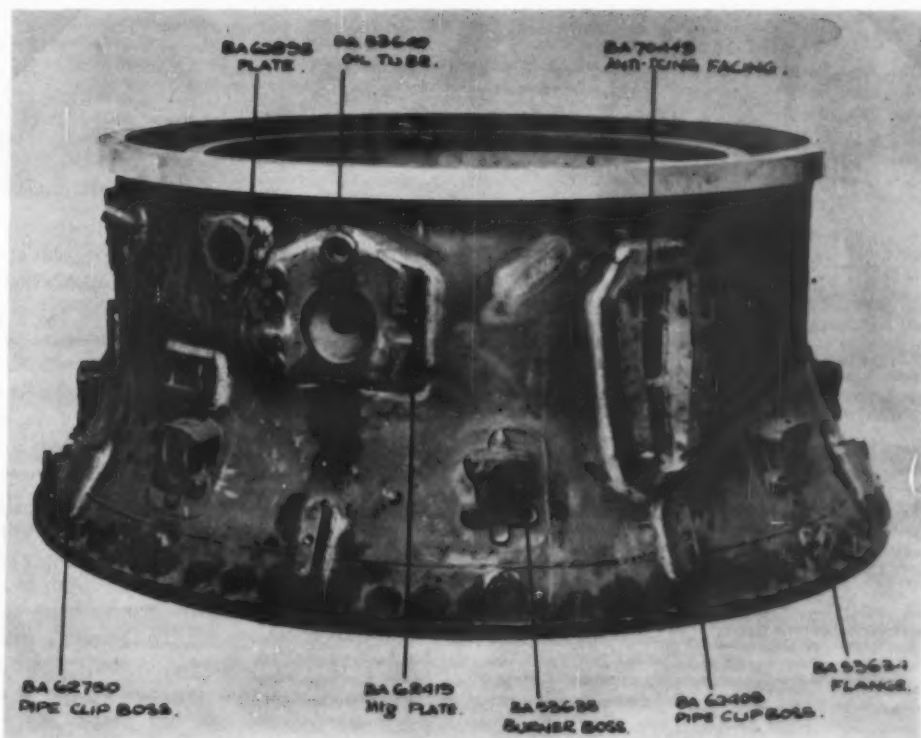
Outlet casing fabricated in steel with welded-on castings.
